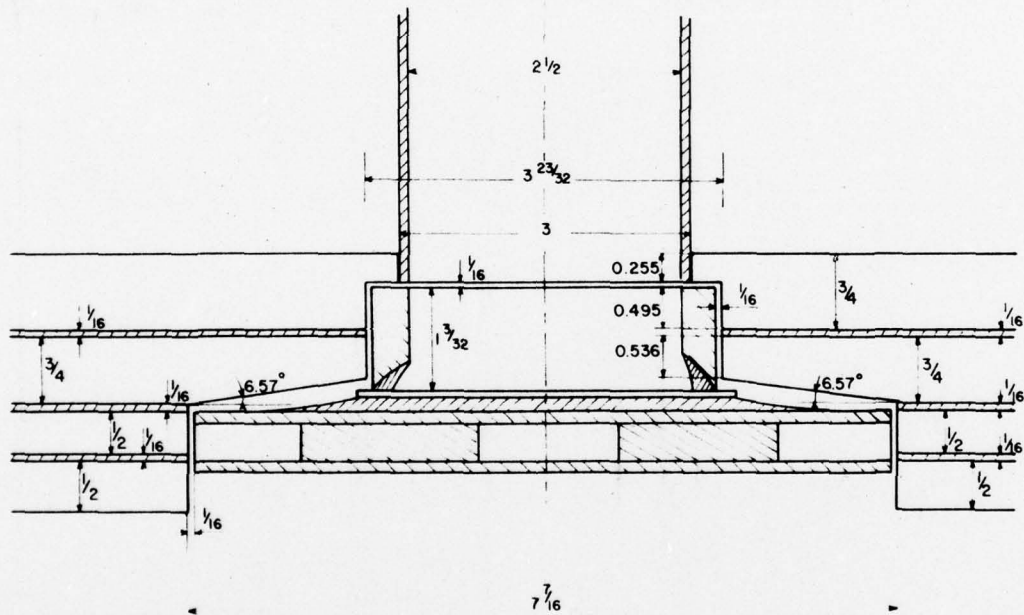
CROSS-SECTION OF THE BRONZE IMPELLER AND CASING
